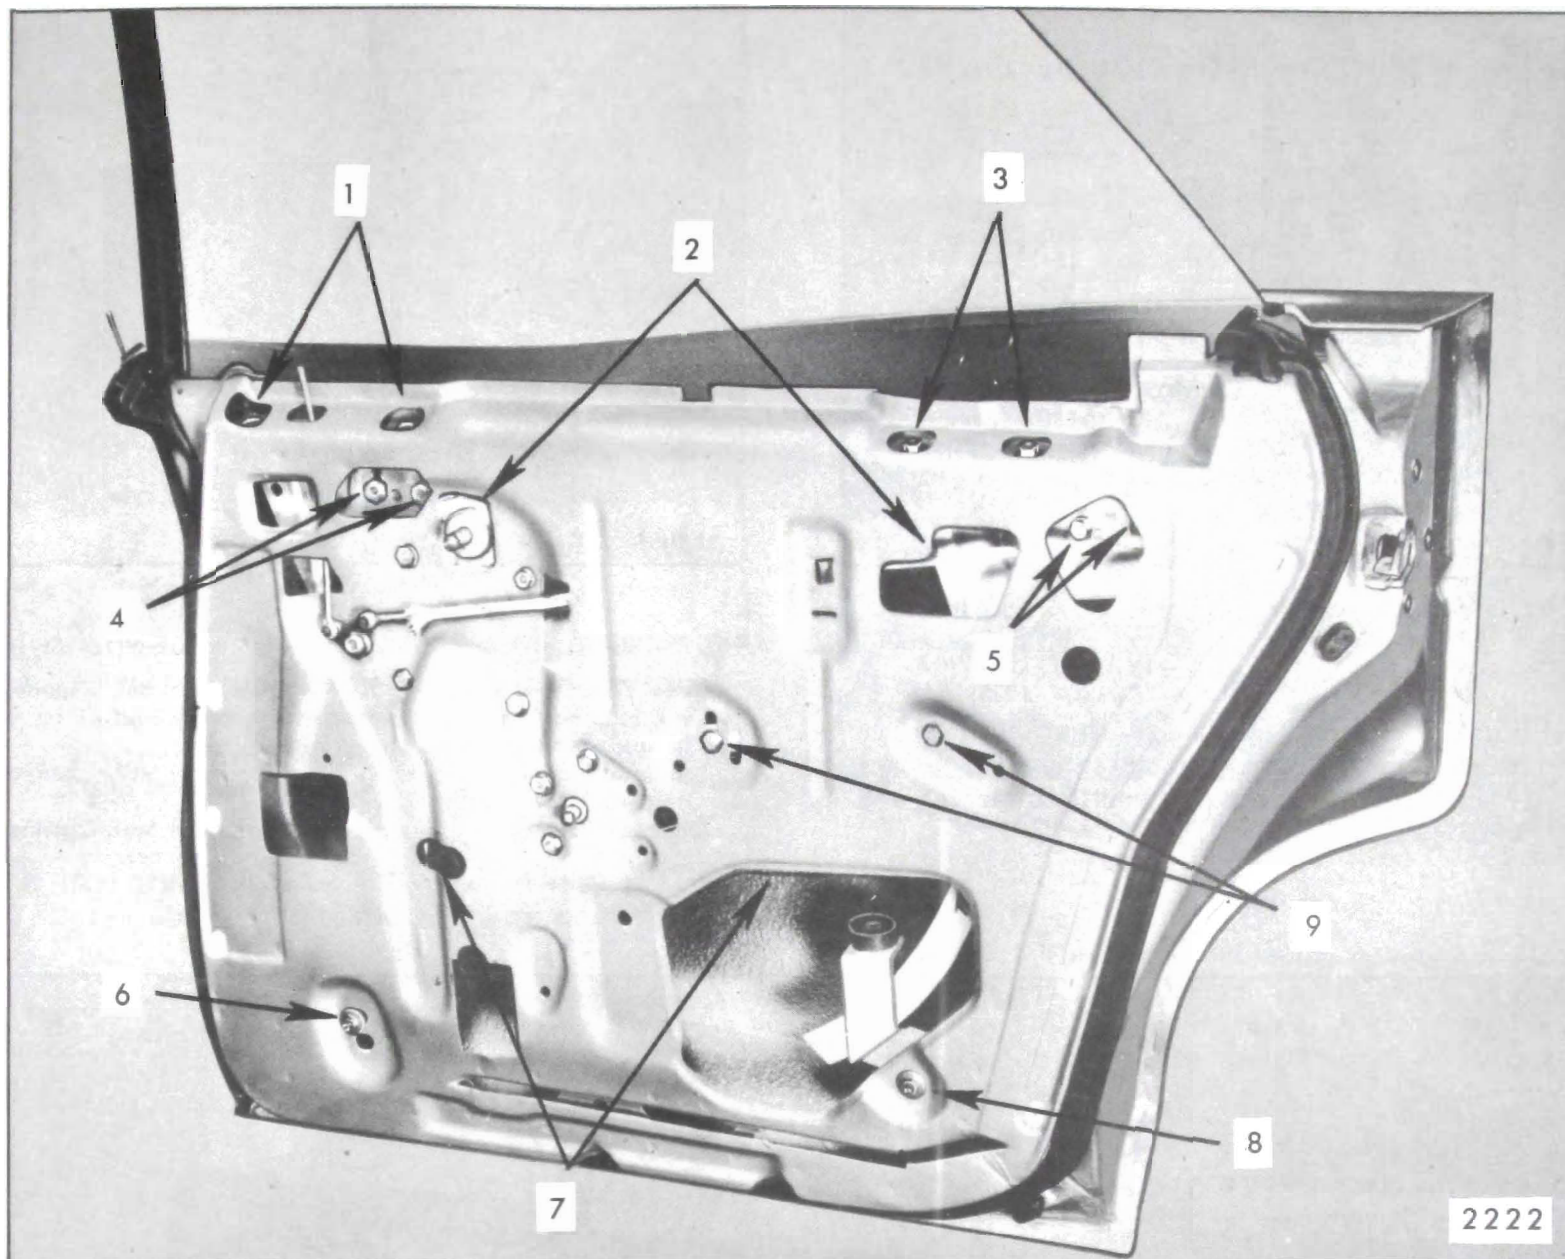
Rear Door Hardware Attachment "B-C 39 and C-69" Except 68069-68169 Styles
